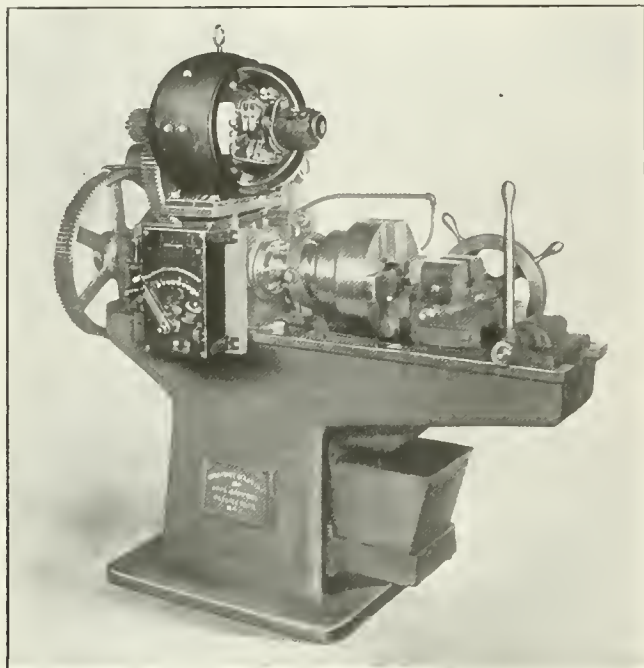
Motor-driven Pipe Threader with Complete Electrical Equipment
